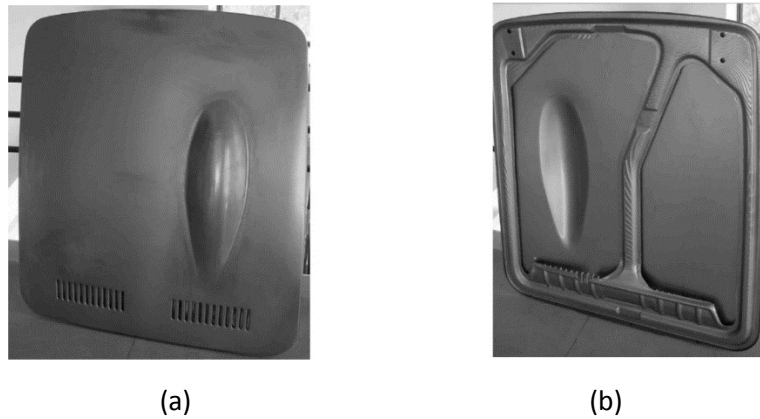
a) top view of component; b) bottom view of component; produced by Amino for Honda [29]
